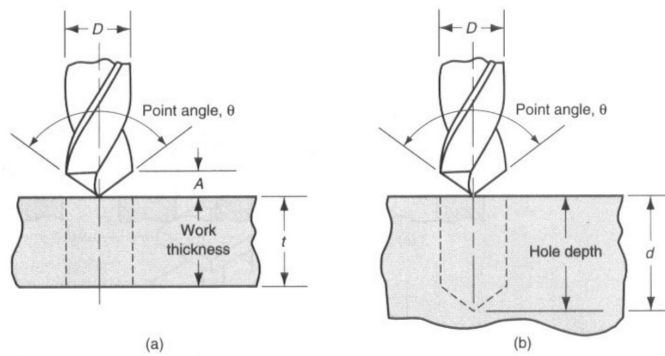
main dimensions and parameters used for the calculation on turning's machining parameters for drilling.
